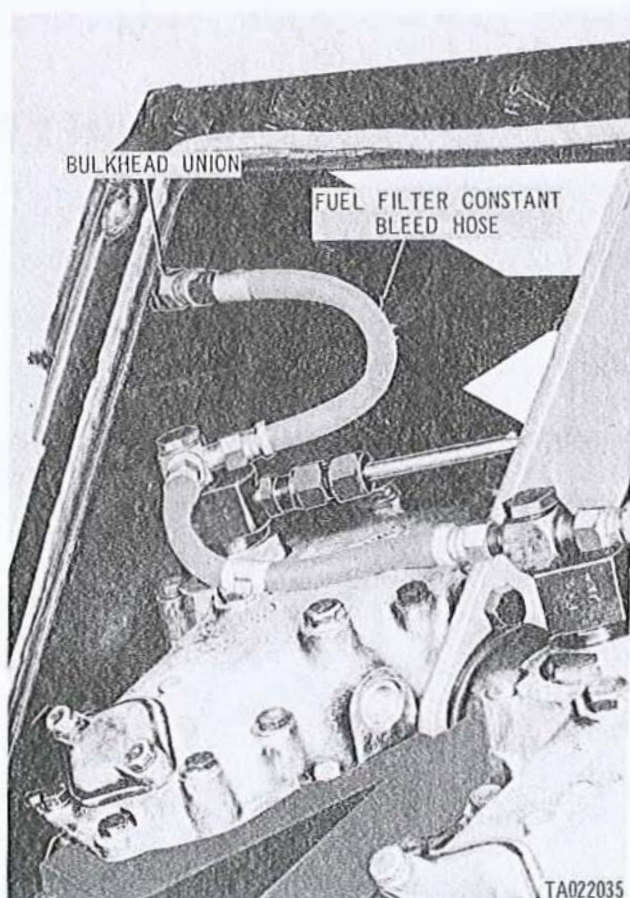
Removing or installing fuel filter constant bleed hose.
